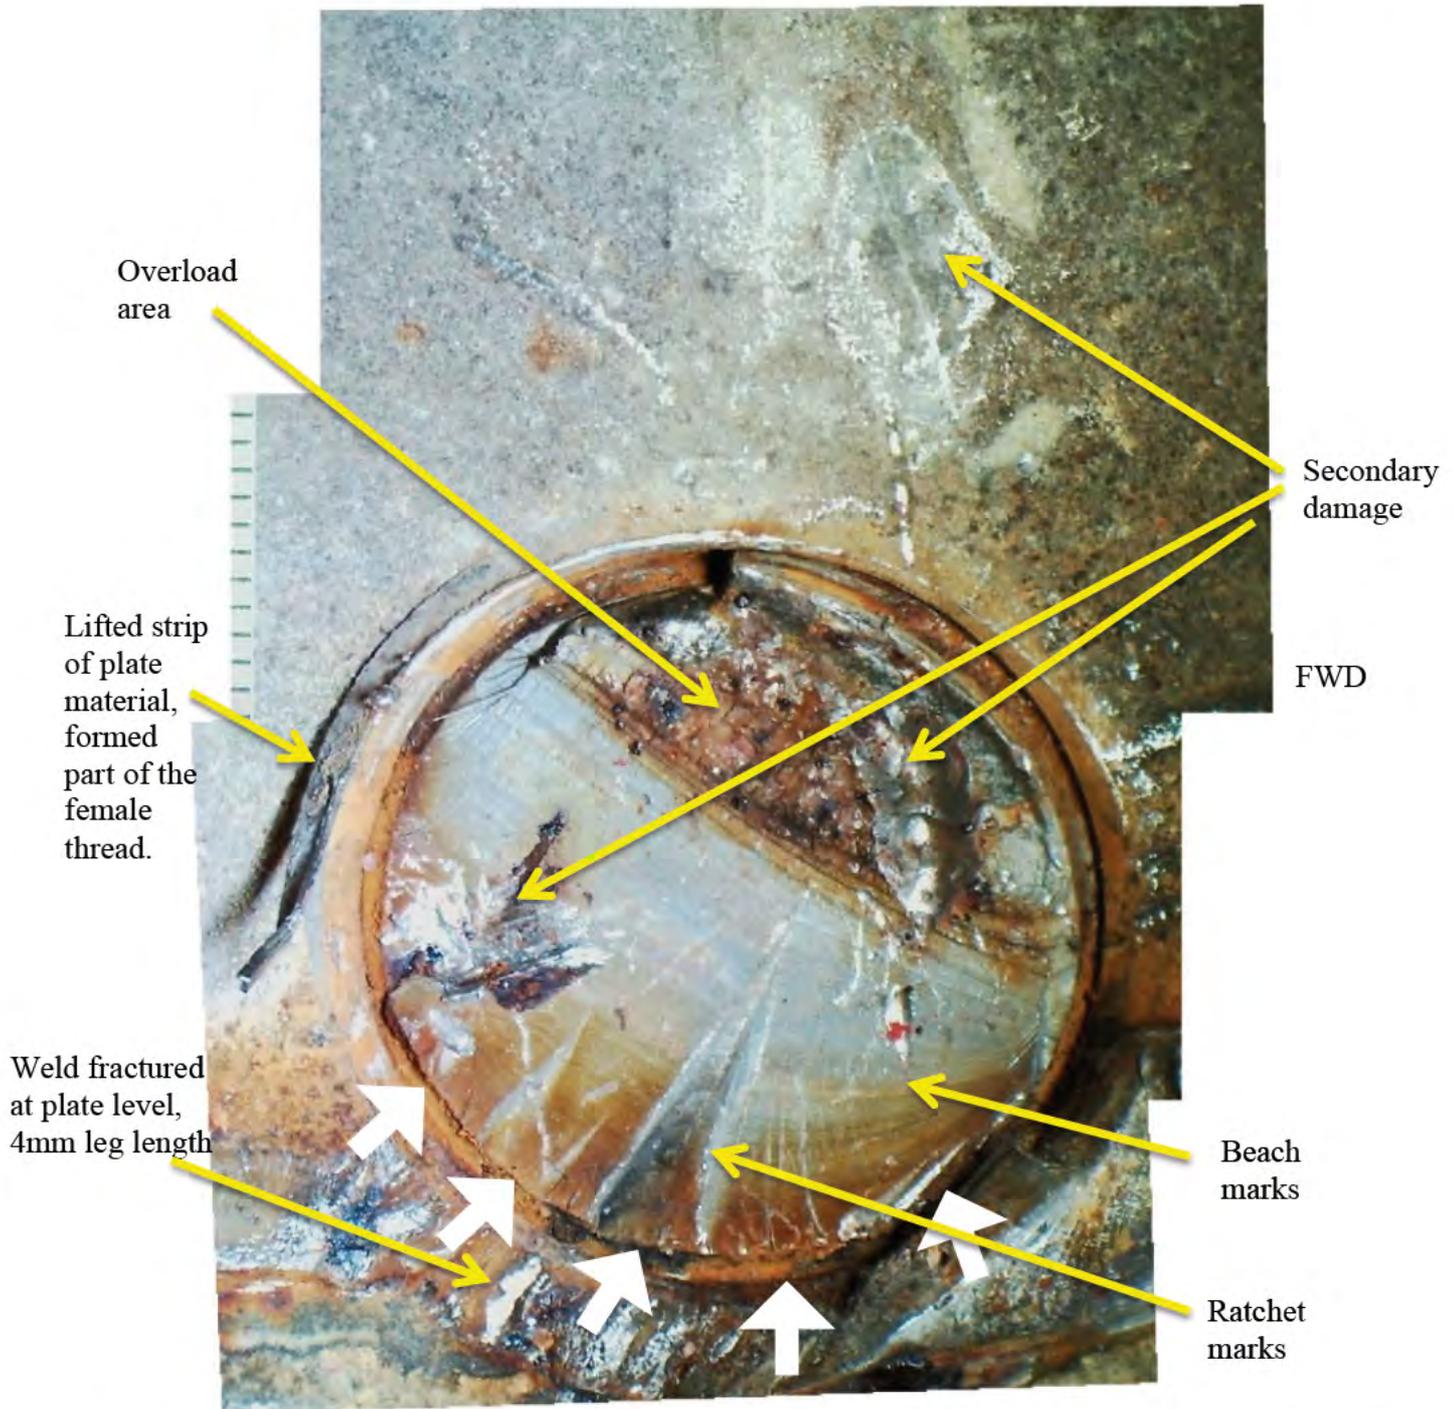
Montage of macroscopic images recorded of Rod 4 fracture. Origins marked with an arrow.
